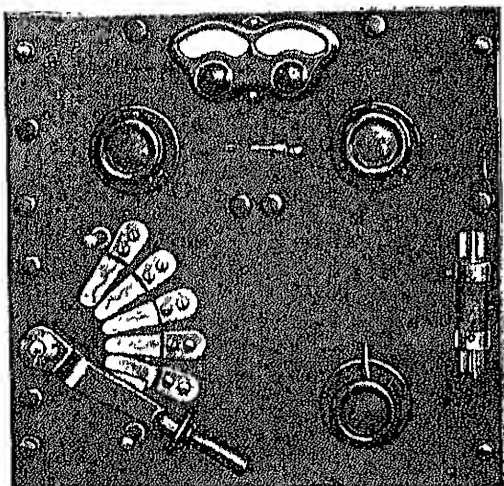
Welding Control Panel for Balancer Set.
